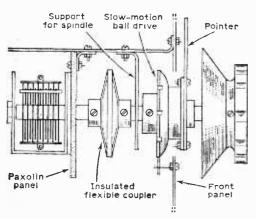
Dial drive assembly for VCI, viewed from the top of the front panel.
